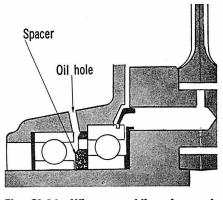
When assembling the crankshaft left main bearings, make sure that spacer between bearings is installed with notches toward end as shown.
